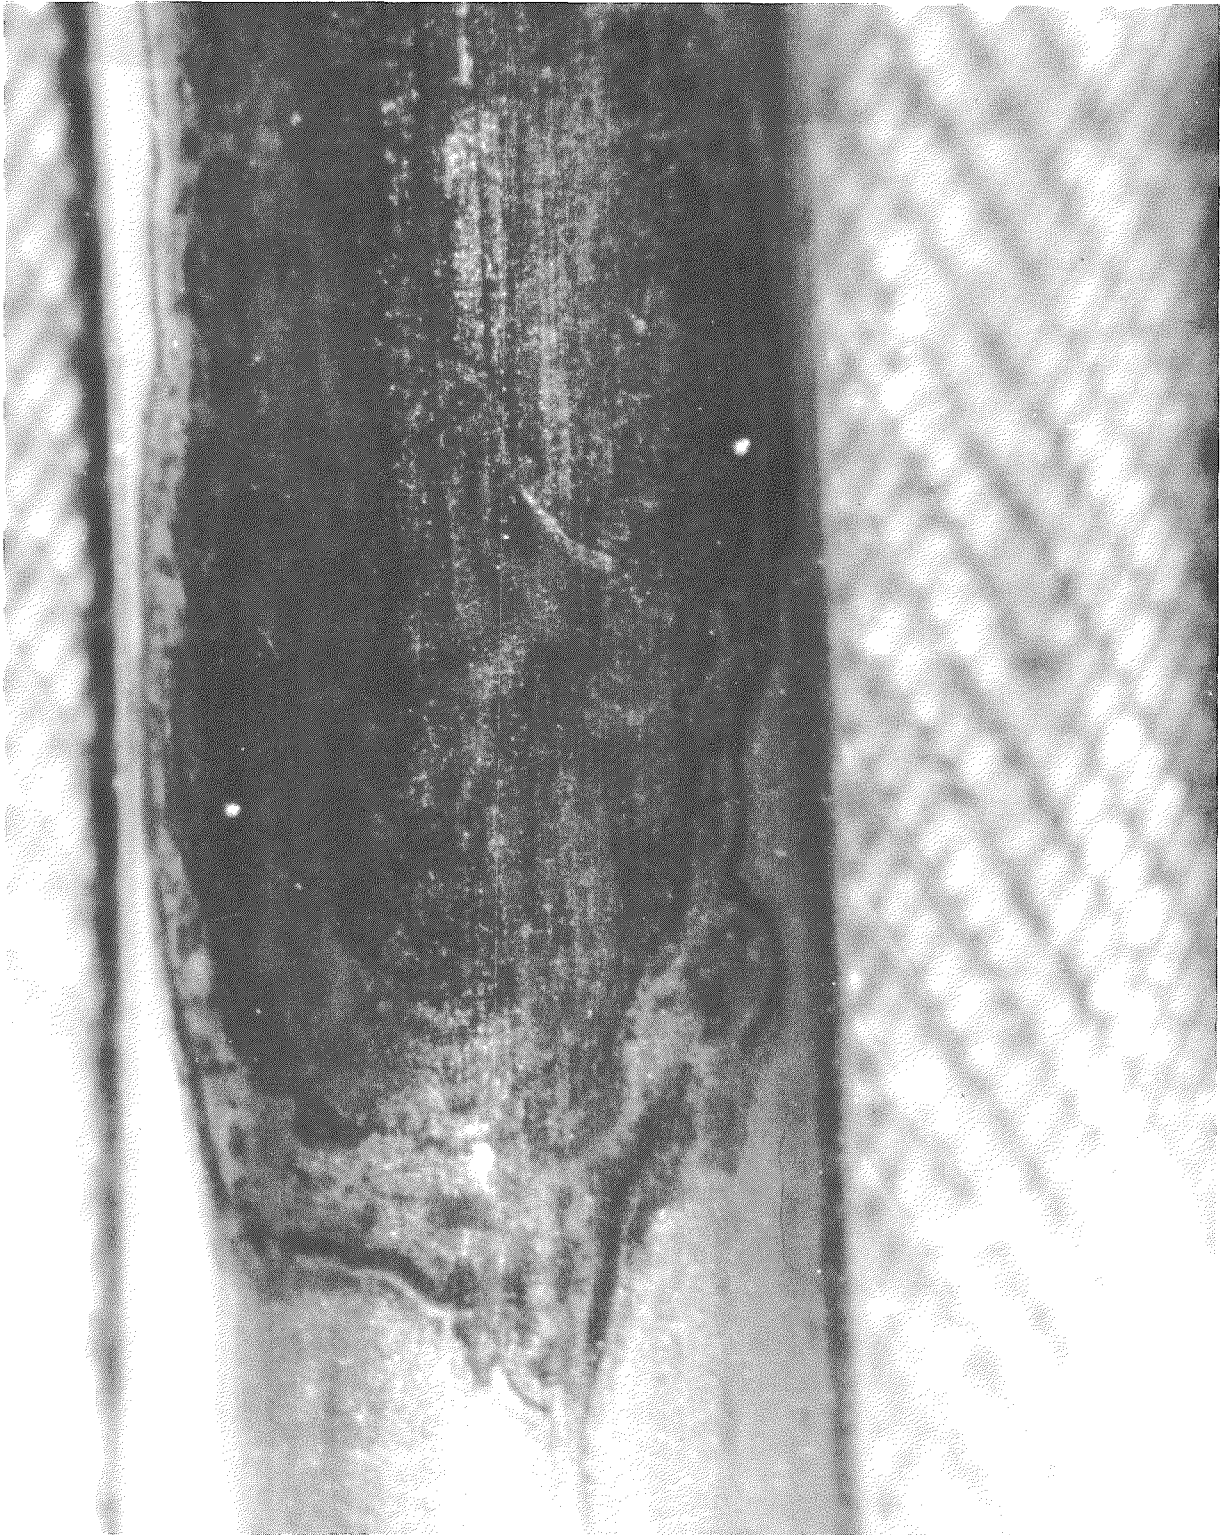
DARK STAIN ON UPPER AXIAL BLANKET PIN FROM SUBASSEMBLY M122
